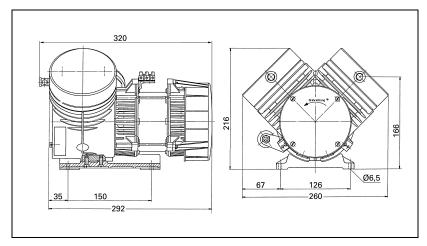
Mounting dimensions N 035.2 S\_E (IP20)
